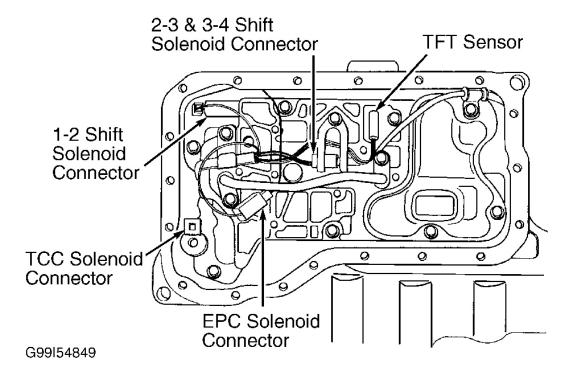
View Of Valve Body Harness & Connectors Courtesy of KIA MOTORS AMERICA, INC.
